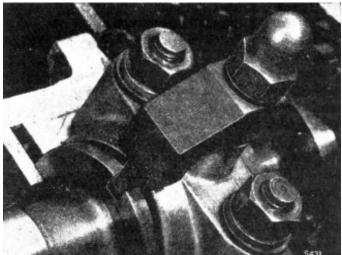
The camshaft locking tool (18G551) in use. See Section A.35 for dimensions
